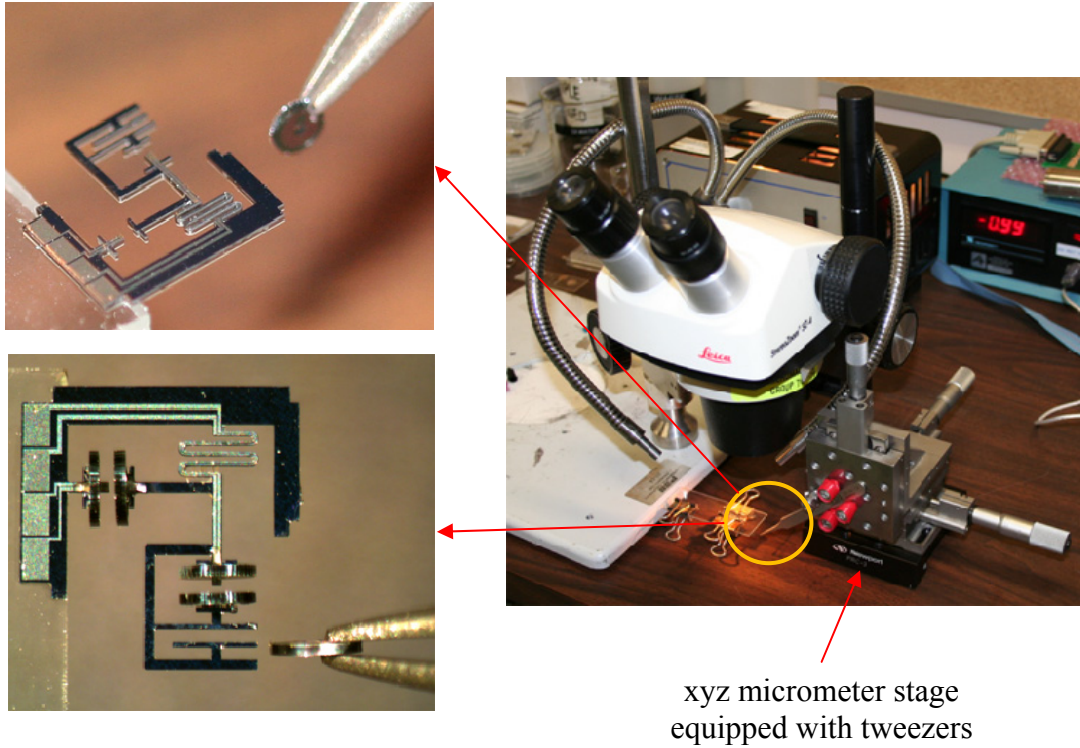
Assembly of discs with tweezers mounted on a xyz micrometer stage. The assembly is performed under a stereoscope.
